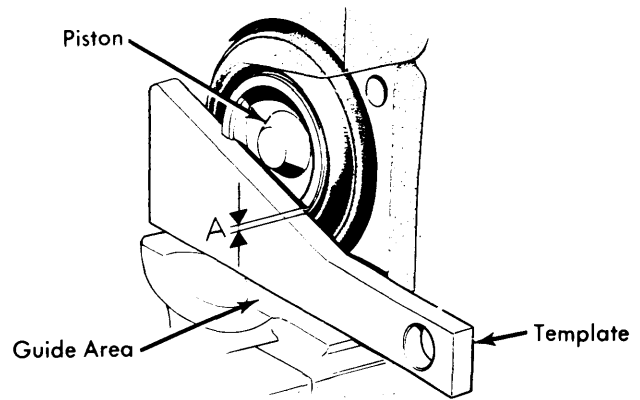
Checking Piston Angle (Rear Brakes Only)
